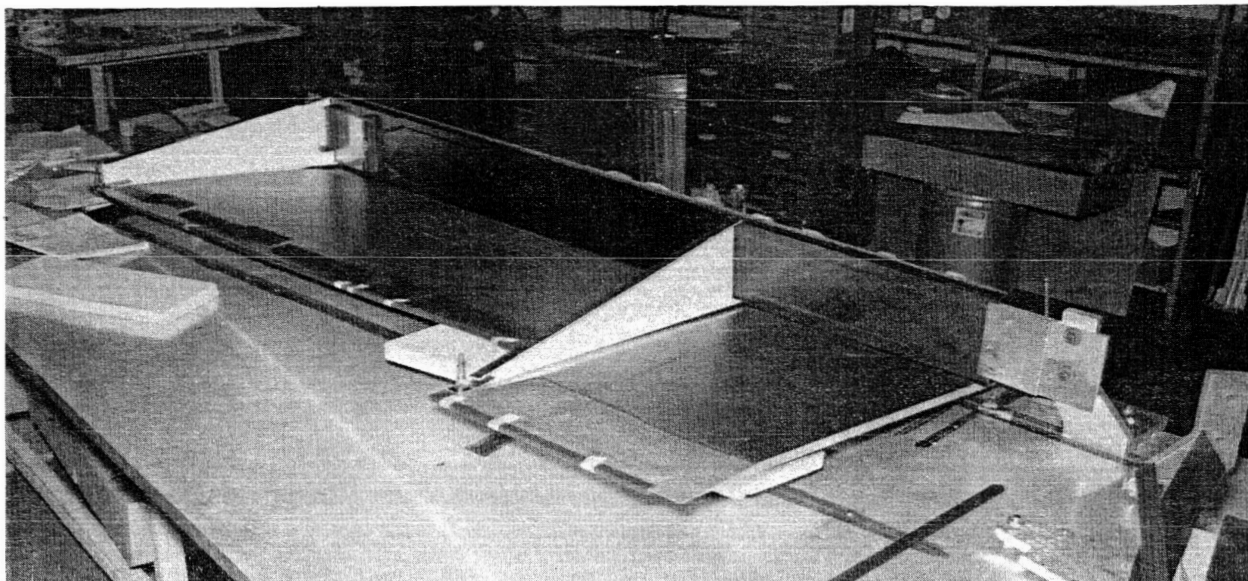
Manufacturing Verification Hardware (Test No. 16) Showing Front Spar, Two Ribs, and Lower Skin Being Assembled
